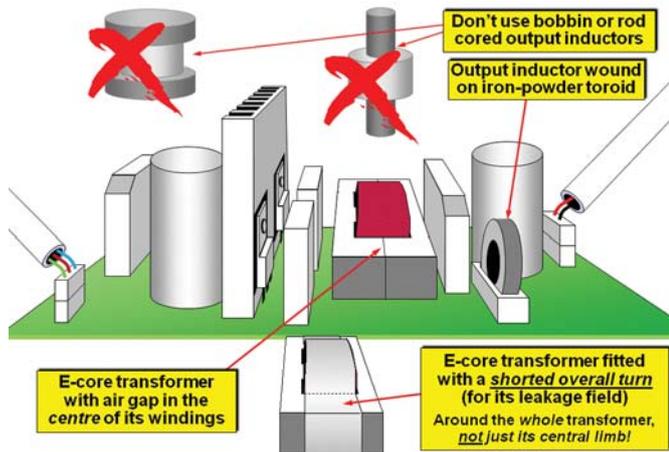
Example PCB assembly using E-core transformer with central air-gap, plus an added output inductor
